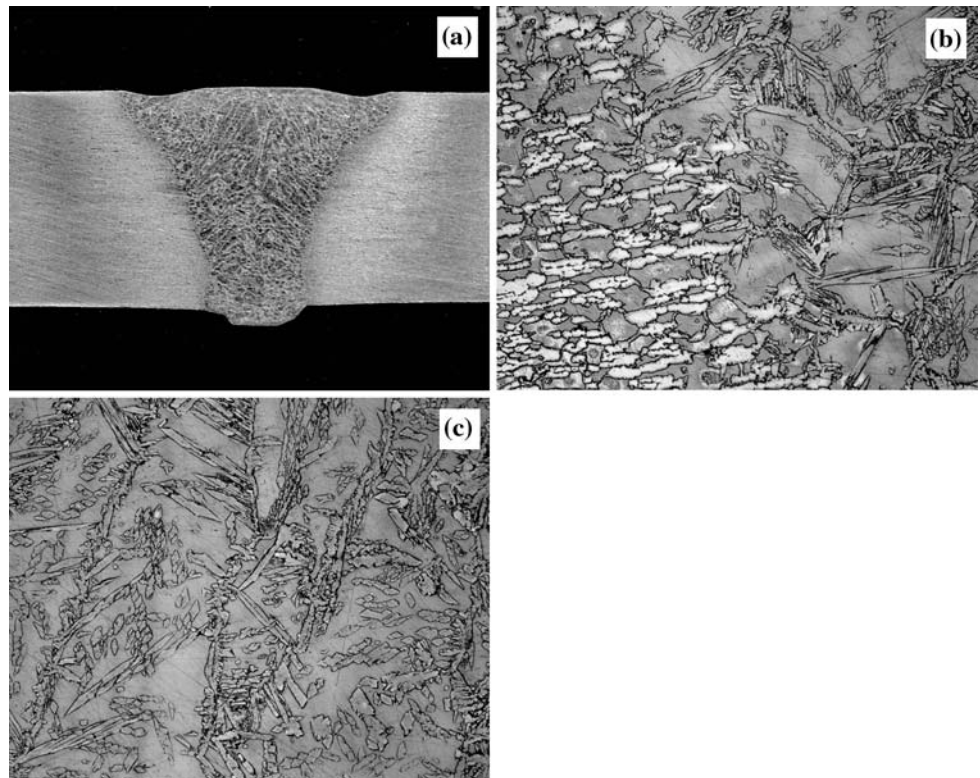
Macro- and microphotographs of Weld 2: (a) macro, (b) HAZ and (c) WM
